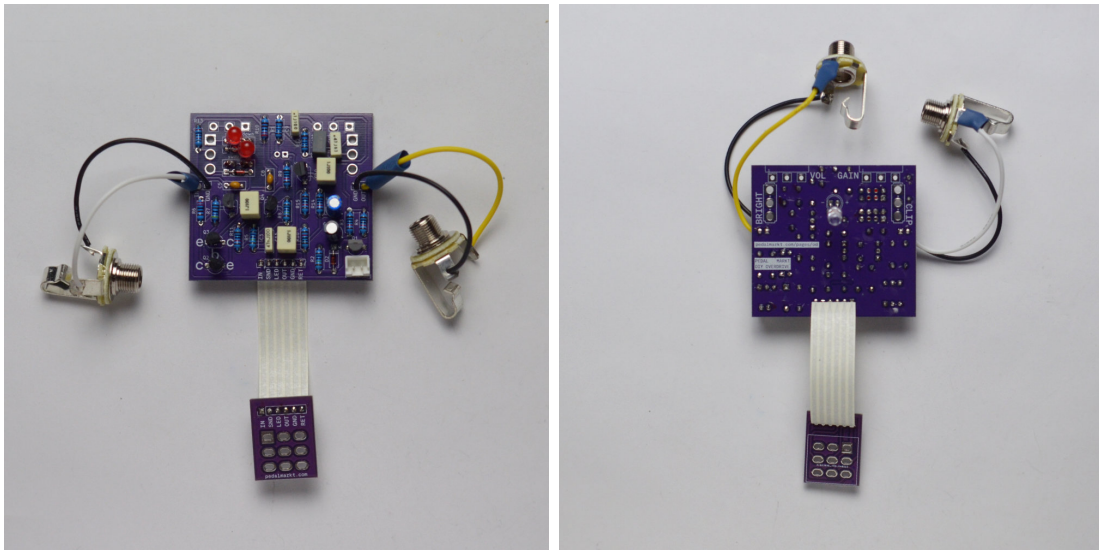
Audio jacks soldered on the left, LED placed but not soldered on the right
